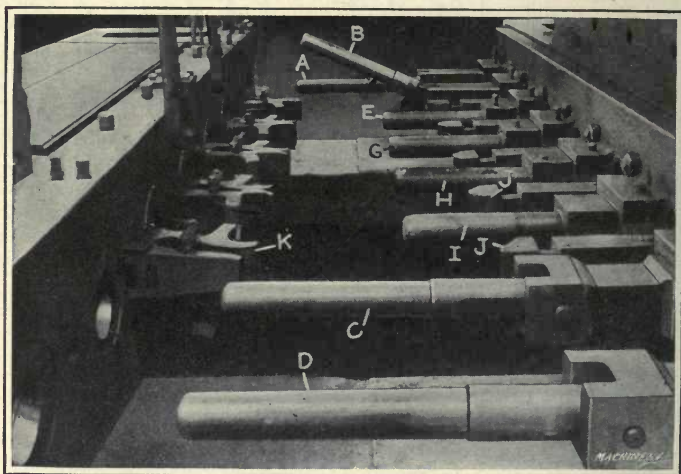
Arrangement of Dies and Punches on Williams & White Bulldozer for forging Russian High-explosive Shells
